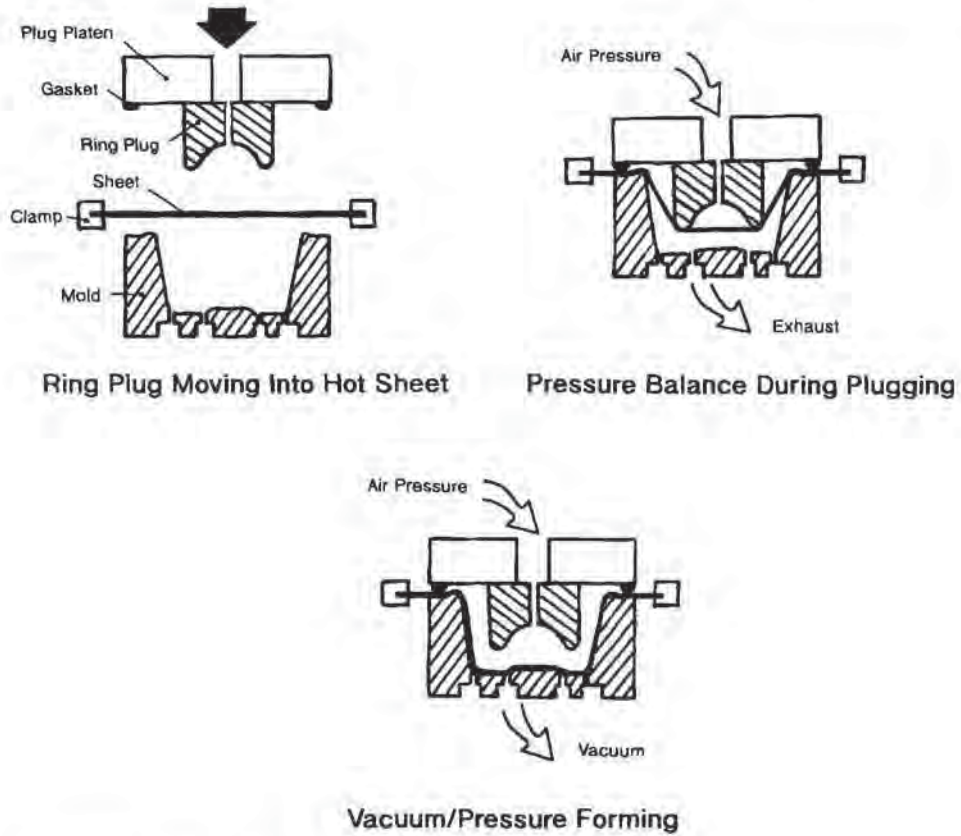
Plug-assisted pressure forming, using a ring plug
